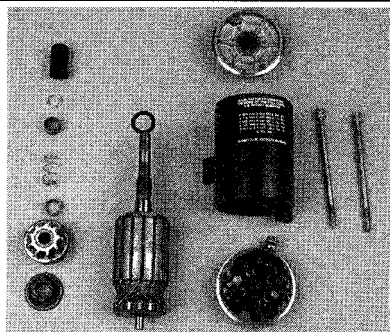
Exploded view of a typical starter. Lay out each of your starter's components in such a manner to ease assembly
